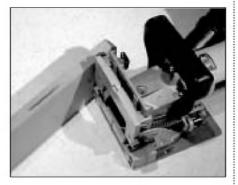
Biscuit cutter and slot. Note the marked center on the tool face.
